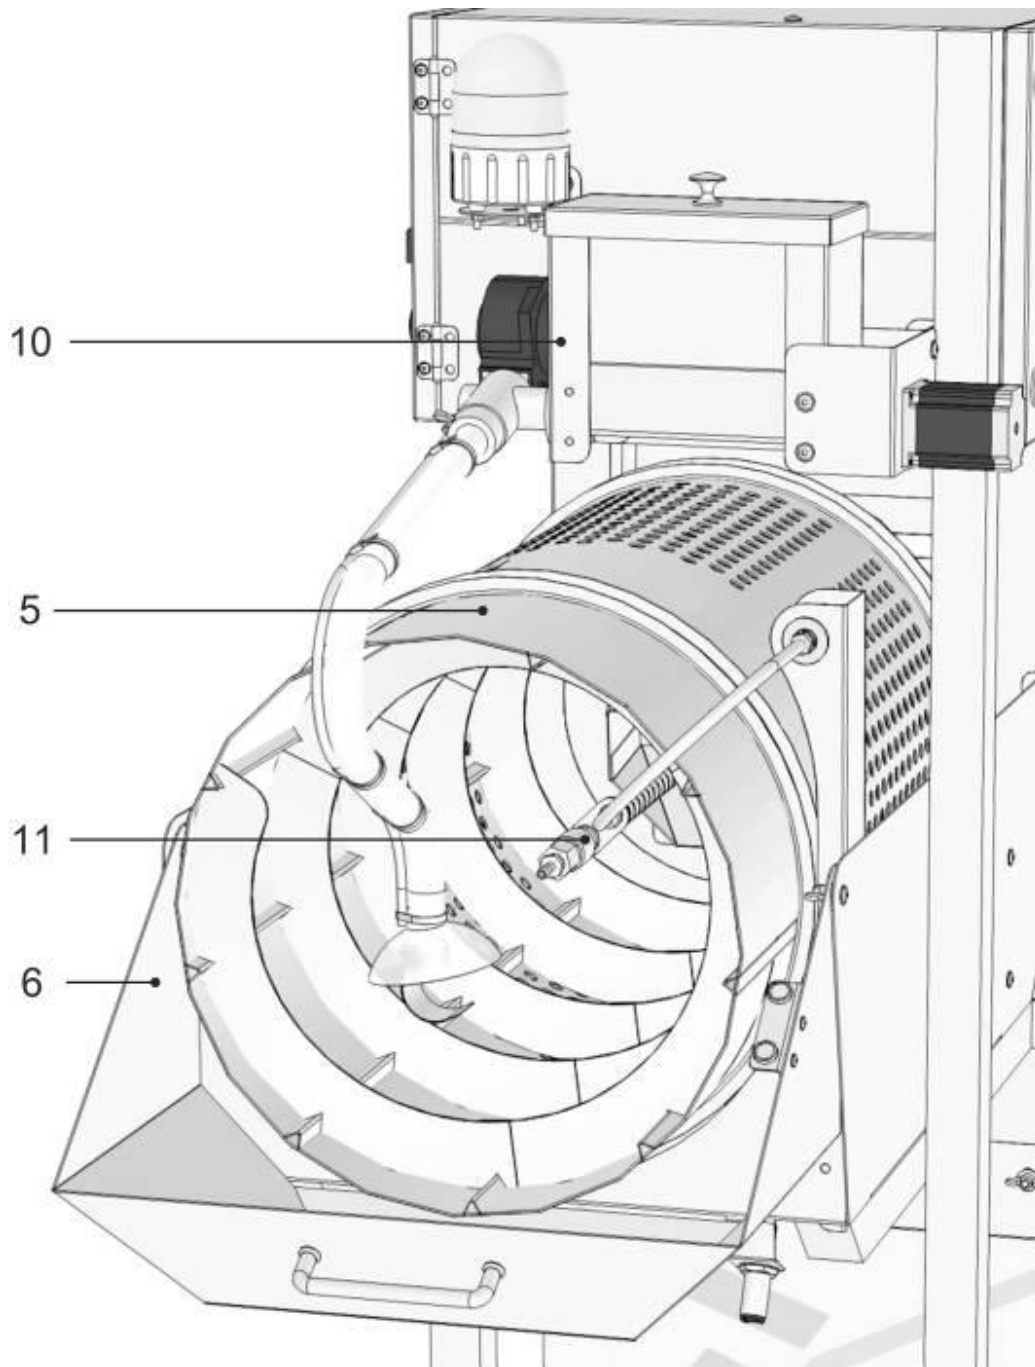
Arrangement of Robopop popcorn machine (right-side view)
